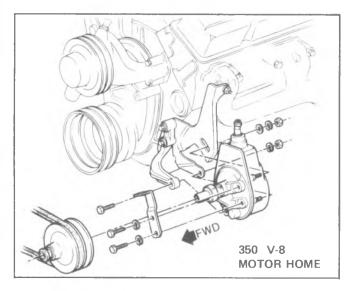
B-115--Power Steering Pump-350 V-8 Motor Home
